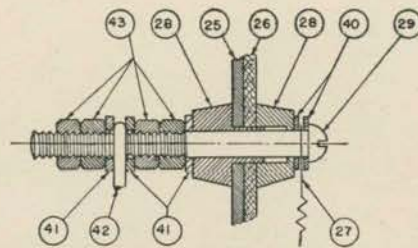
Details of the Method of Supporting the Heaters on Asbestos Board (For Description of Parts, see Table I)
